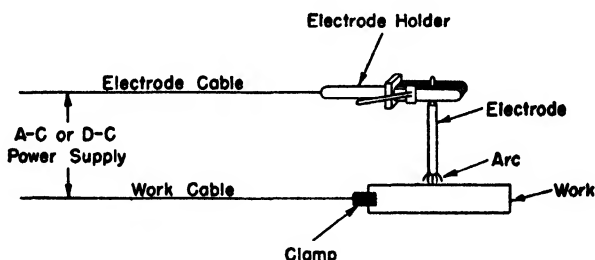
Elementary diagram of circuit components for metal arc welding.
